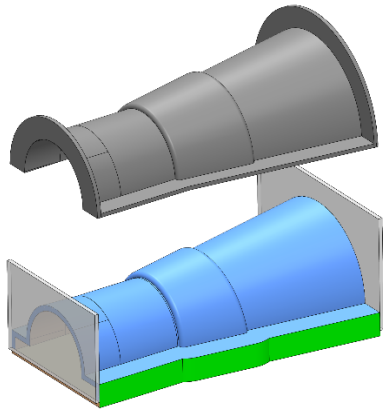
The CAD model of the runner housing layup mold (left) and the final printed version (right).
